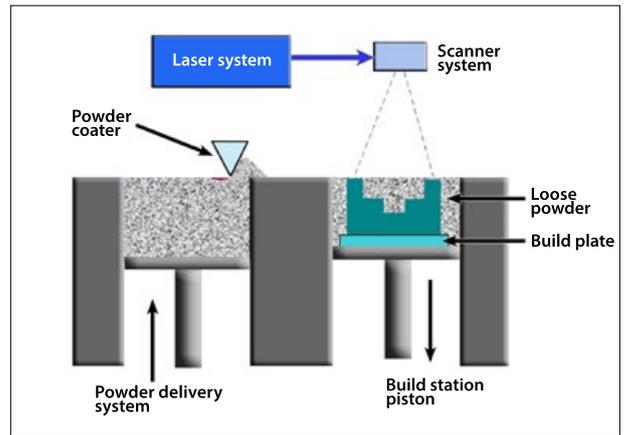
Schematic showing powder bed fusion technology (Courtesy Jim Sears)
